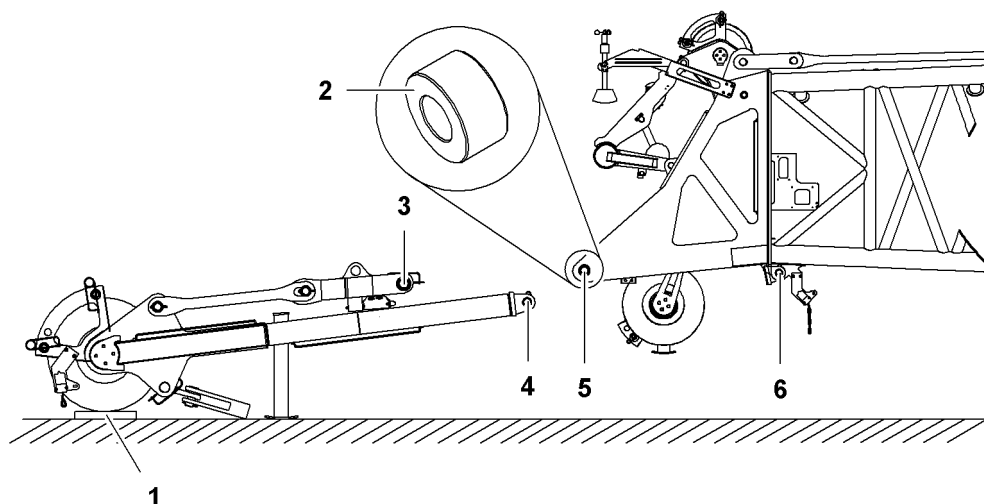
Positioning the auxiliary jib (79300 lb) in front of the boom head section and inserting bushes
